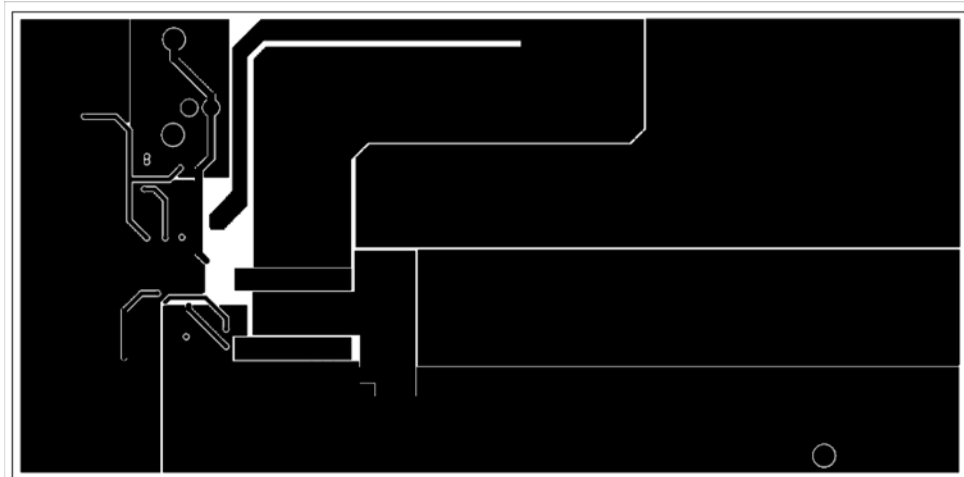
ISL8106EVAL1Z - BOTTOM LAYER (SOLDER SIDE)
